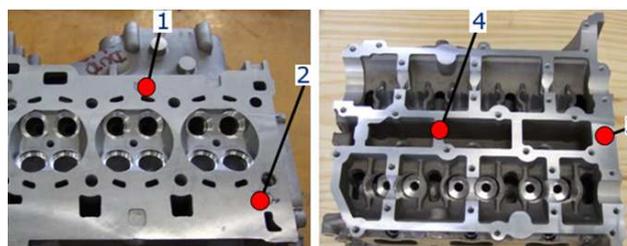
Workpiece used for machining tests with heated part and indication of temperature measurement points.
